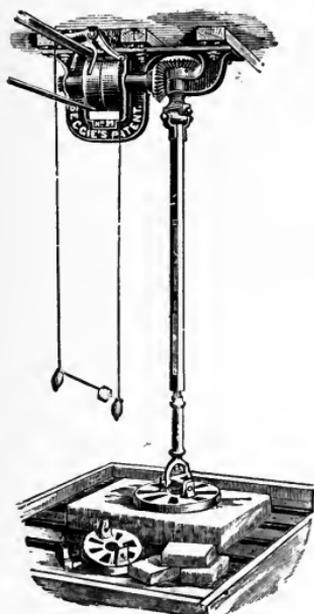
OVER-HEAD STONE GRINDING MACHINE.
